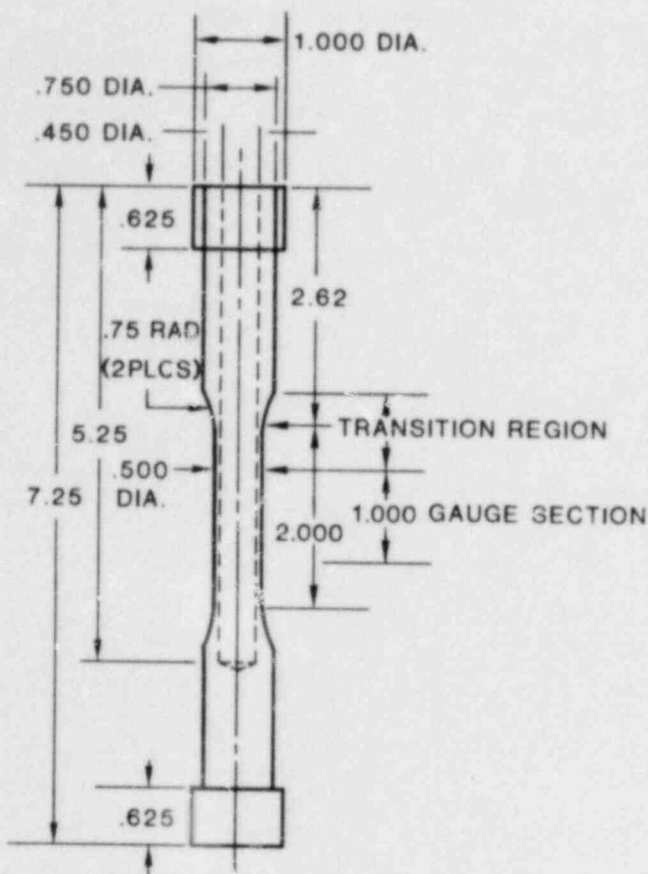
Multi-axial Specimen Geometry (All dimensions in inches)
